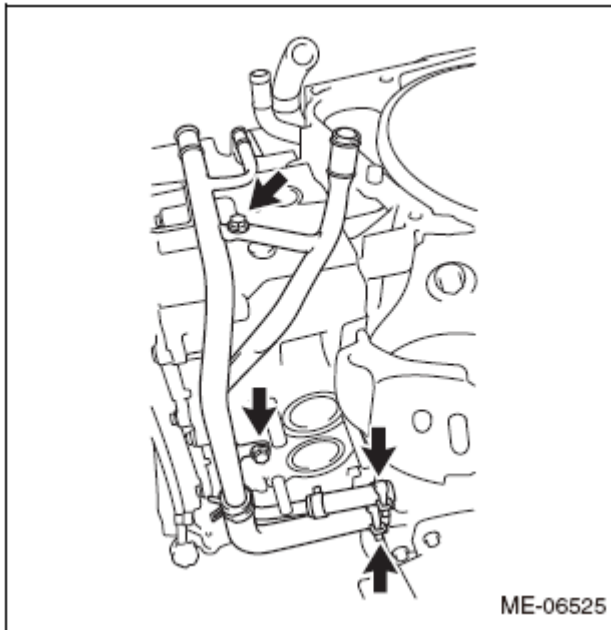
Identifying Water By-Pass Hose No. 1 Hose Clamps And Bolts
